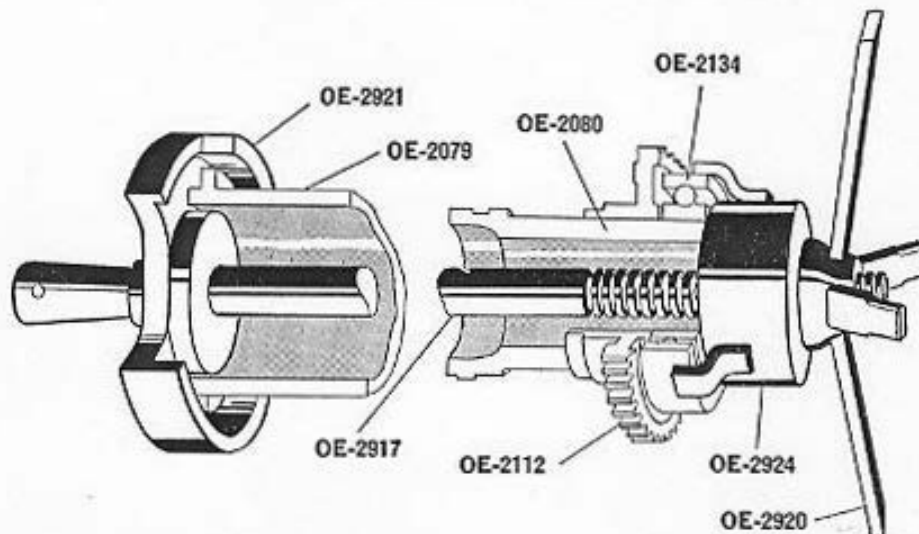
Assembling column raising spindle spur wheel (OE-2112) and ball bearing (OE-2134) onto the column raising spindle (OE-2080)
